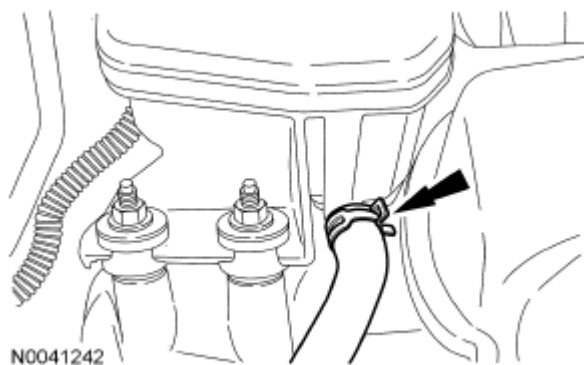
Locating Power Steering Hose To Power Steering Reservoir Clamp
